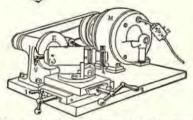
An electric-motor-driven valve-face grinding ma-chine.² M, electric motor; 3, switch; E, emery wheel; V, valve to be ground; 1, 2 and 4 are for positioning the valve (V) with wheel (E).
